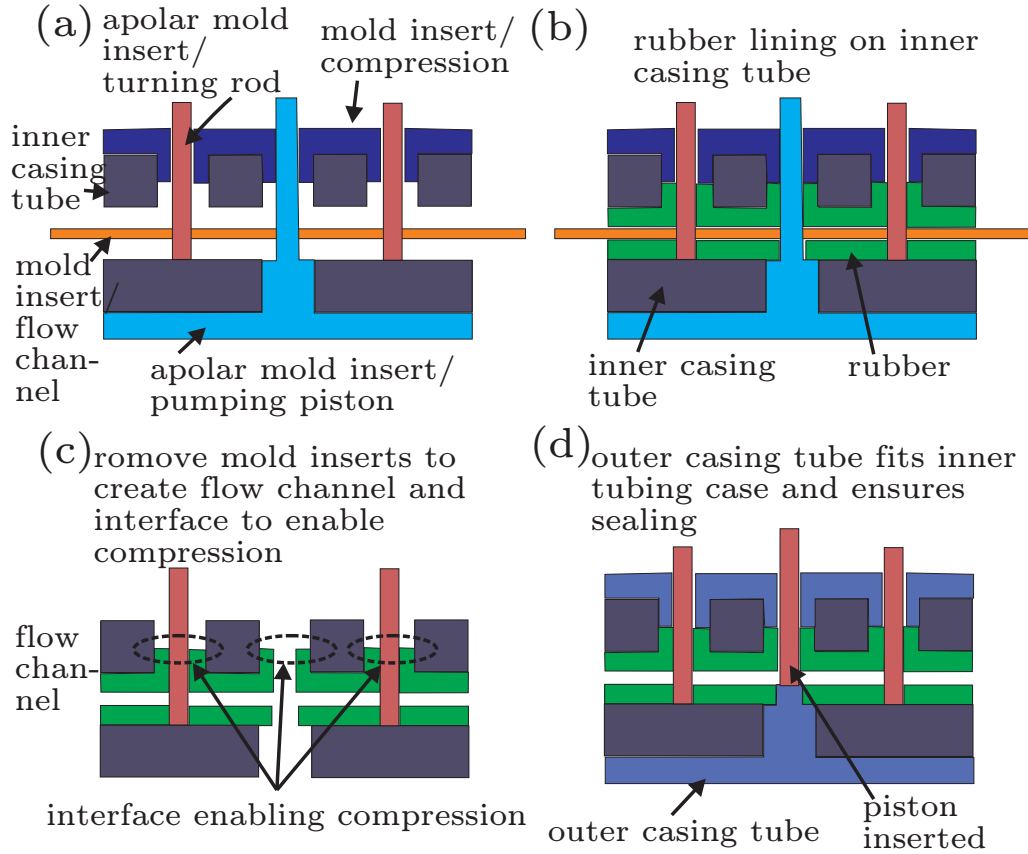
Illustration of molding process for piston pump using turning valves. (a) Inner casing tube with mold insert to create flow channel, two apolar mold inserts which are to be used as turning valves. An apolar mold insert to create the pump chamber, and an insert to enable compression is also shown. The two latter parts are surrounding the inner casing. Apolar mold inserts (low surface energy) ensures a low energy rubber surface, and, consequently, a low friction coefficient Ref. [39] (b) A rubber lining is created by injecting liquid rubber into the inner casing. (c) Mold inserts are removed and leaves a flow channel and a pump chamber. (d) The pumping piston is inserted and the upper and lower shell of the outer casing tube is pressed on.
